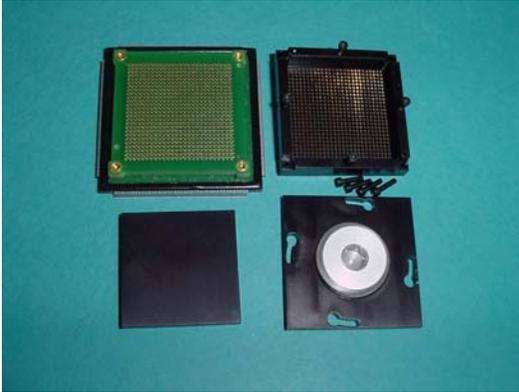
Before assembly of “CQFP to FBGA adapter socket” (SI-SX32-CQ256SFG484)
